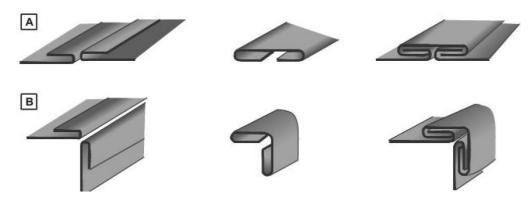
(A) cap strip seam, (B) locked corner seam
